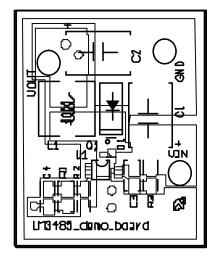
Silk Screen, Typical PCB Layout (3.3V Output)
